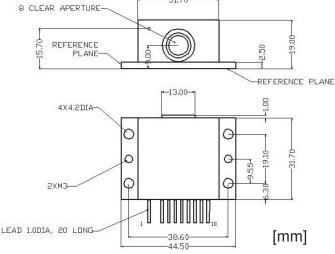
Support mounting for HHL-27 (specifications of the HHL-L module)
